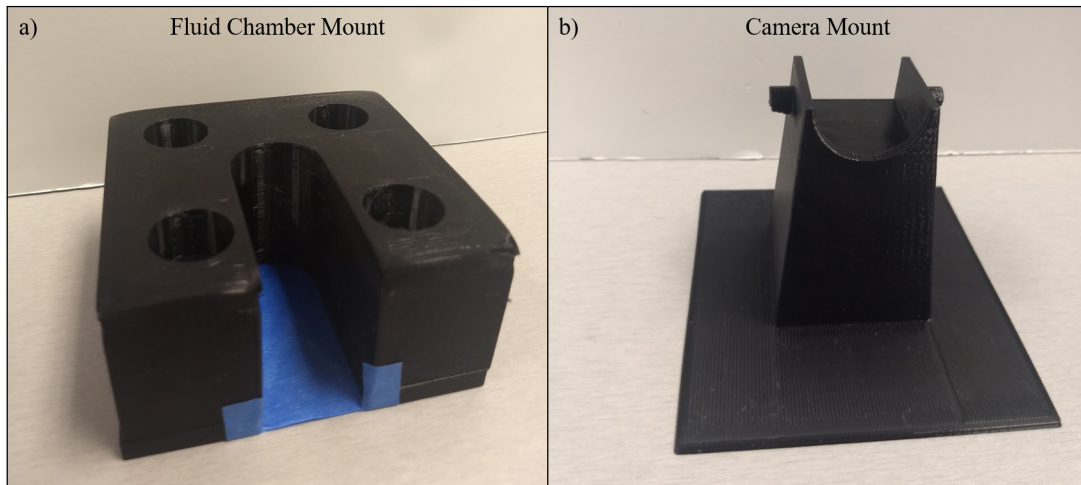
(a) Phase 1 Fluid Chamber Mount and (b) Phase 1 High-Speed Camera Mount, Made from 3D Printed Material
